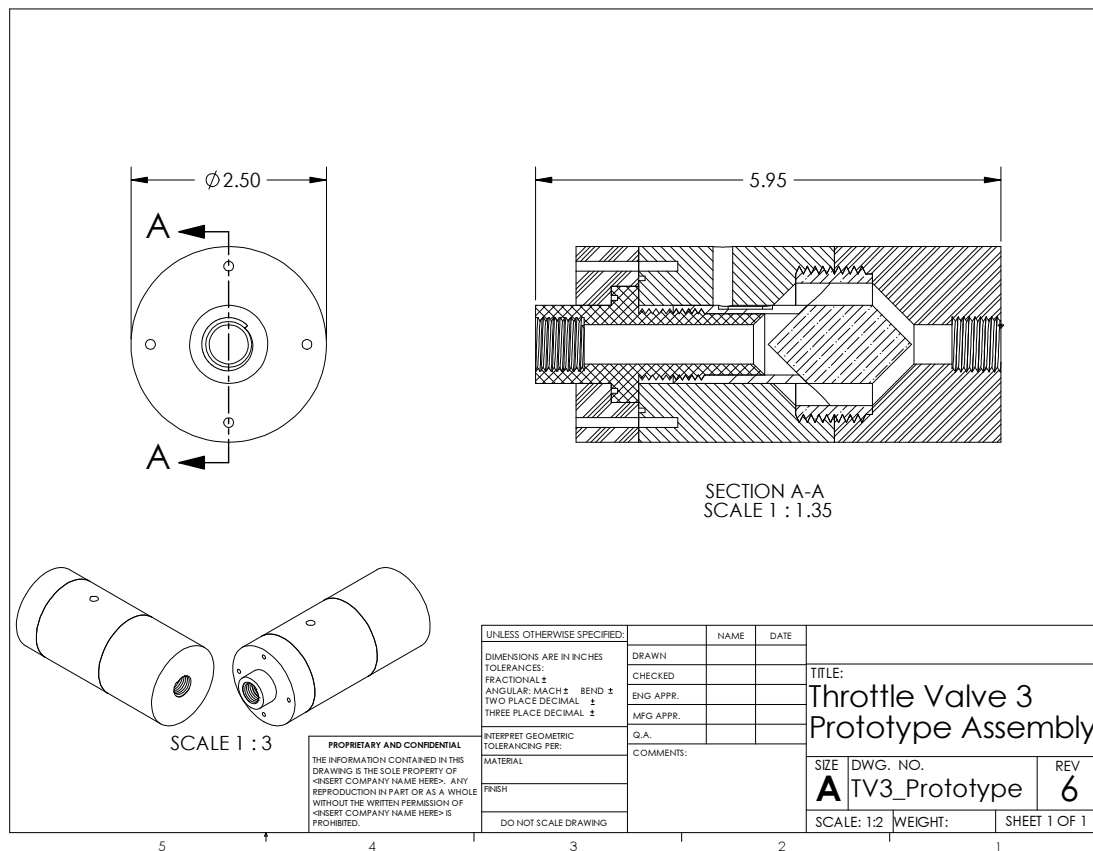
Assembly drawing for split-flow plug valve prototype (TV3).
